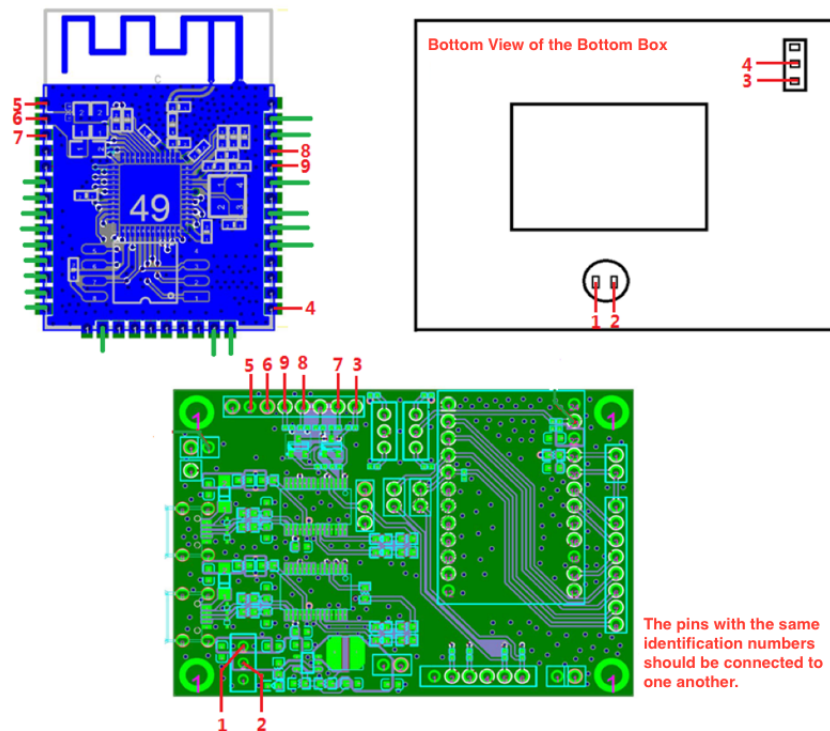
The Wiring of the ESP-WROOM-32 Fixture
